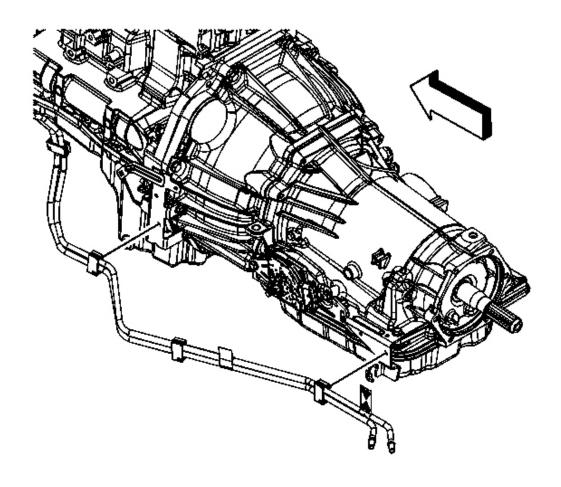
View Of Clips Attaching Fuel Feed Lines To Transmission Courtesy of GENERAL MOTORS CORP.
